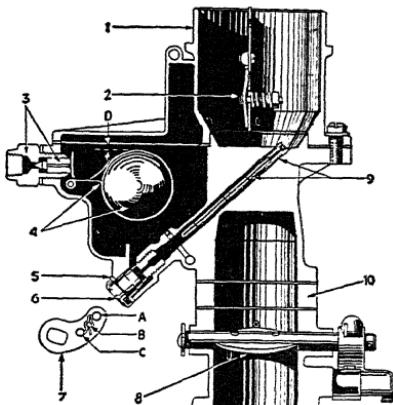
Side Cross Section of Plymouth-Chrysler Carburetor
